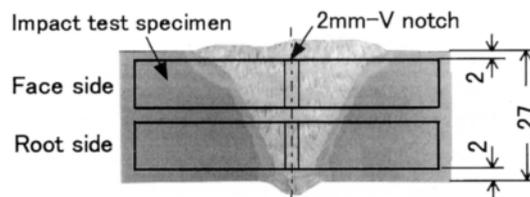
Location of impact test specimens removed from DW-55E welds (One-side welding with a ceramic backing material of FBB-3T)
